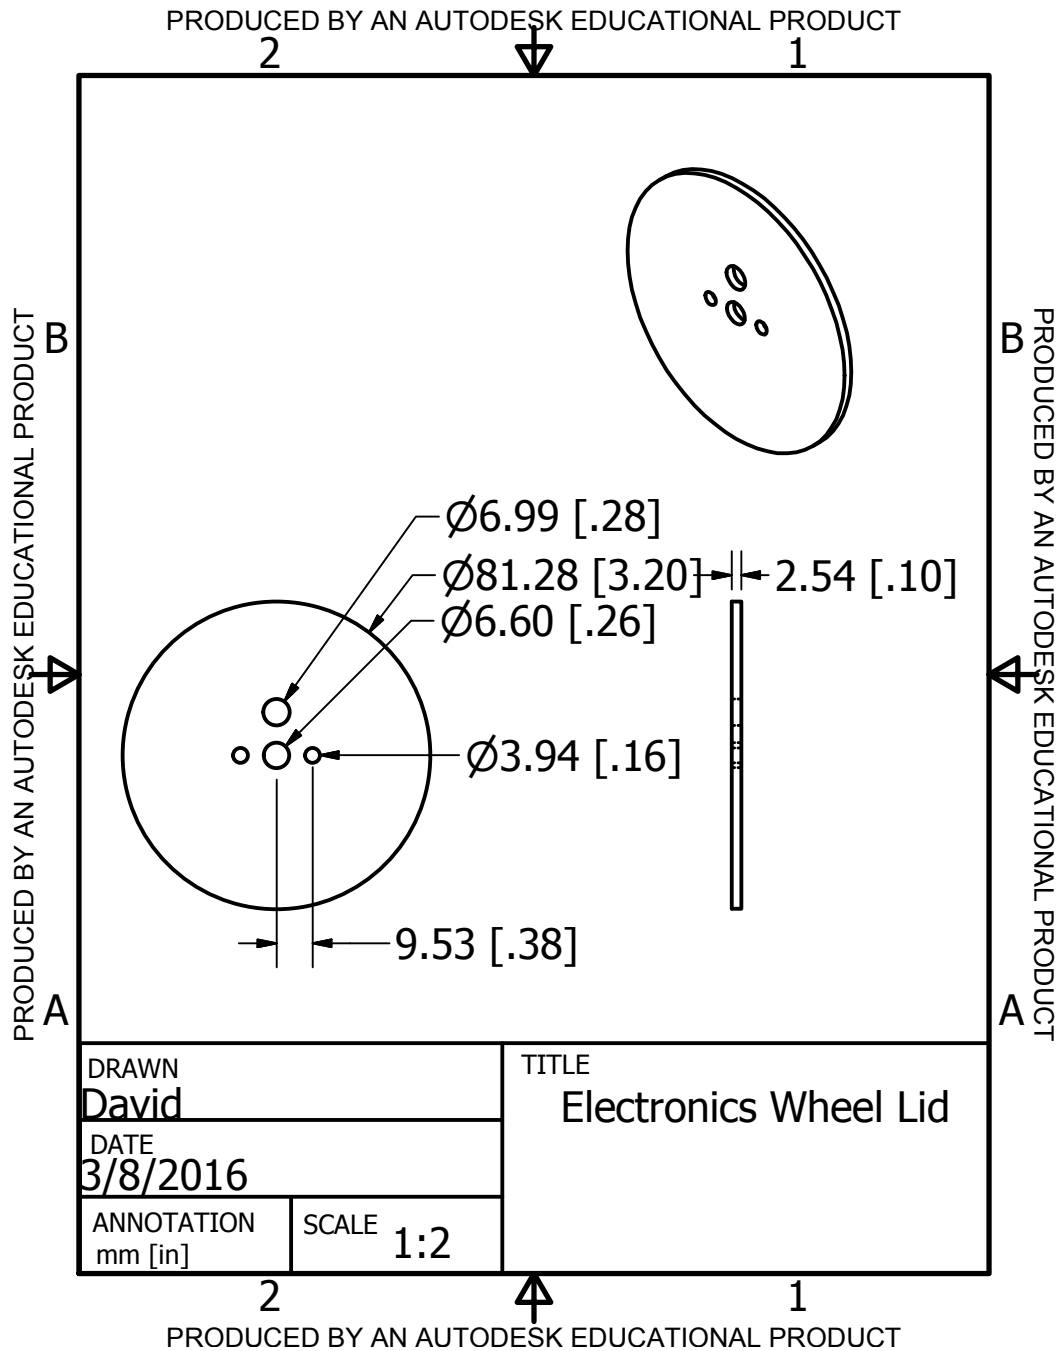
Mechanical drawing for lid of electronics wheel. The two 9.53 mm holes are clearance for 6-32 screws that rotationally lock the electronics wheel to the rotating components in the roller clutch. The 6.99 mm hole is so that the ribbon cable from the button box can be inserted into the enclosure. The central hole is to pivot around the axle.
